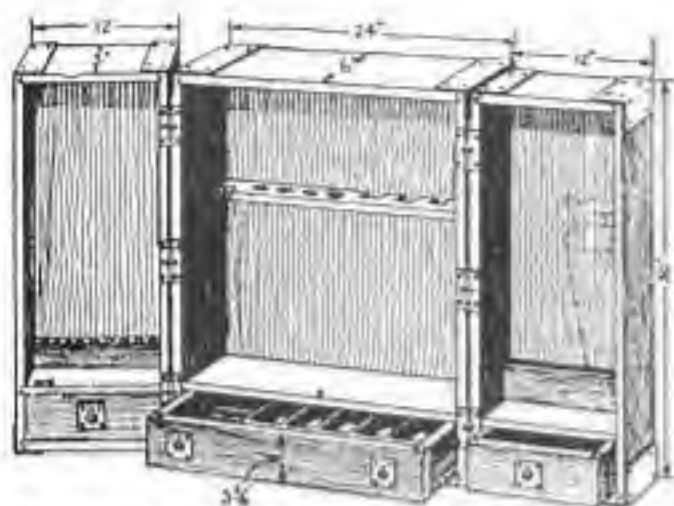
The wall tool cabinet open to show the construction. In the large drawer is a removable sliding tray for small tools or screws.
